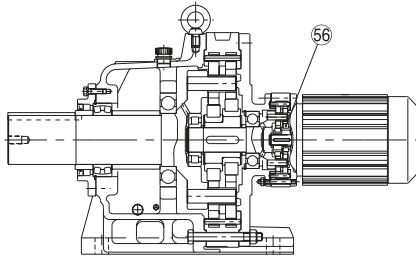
Type CHHM (Horizontal Gearmotor)
